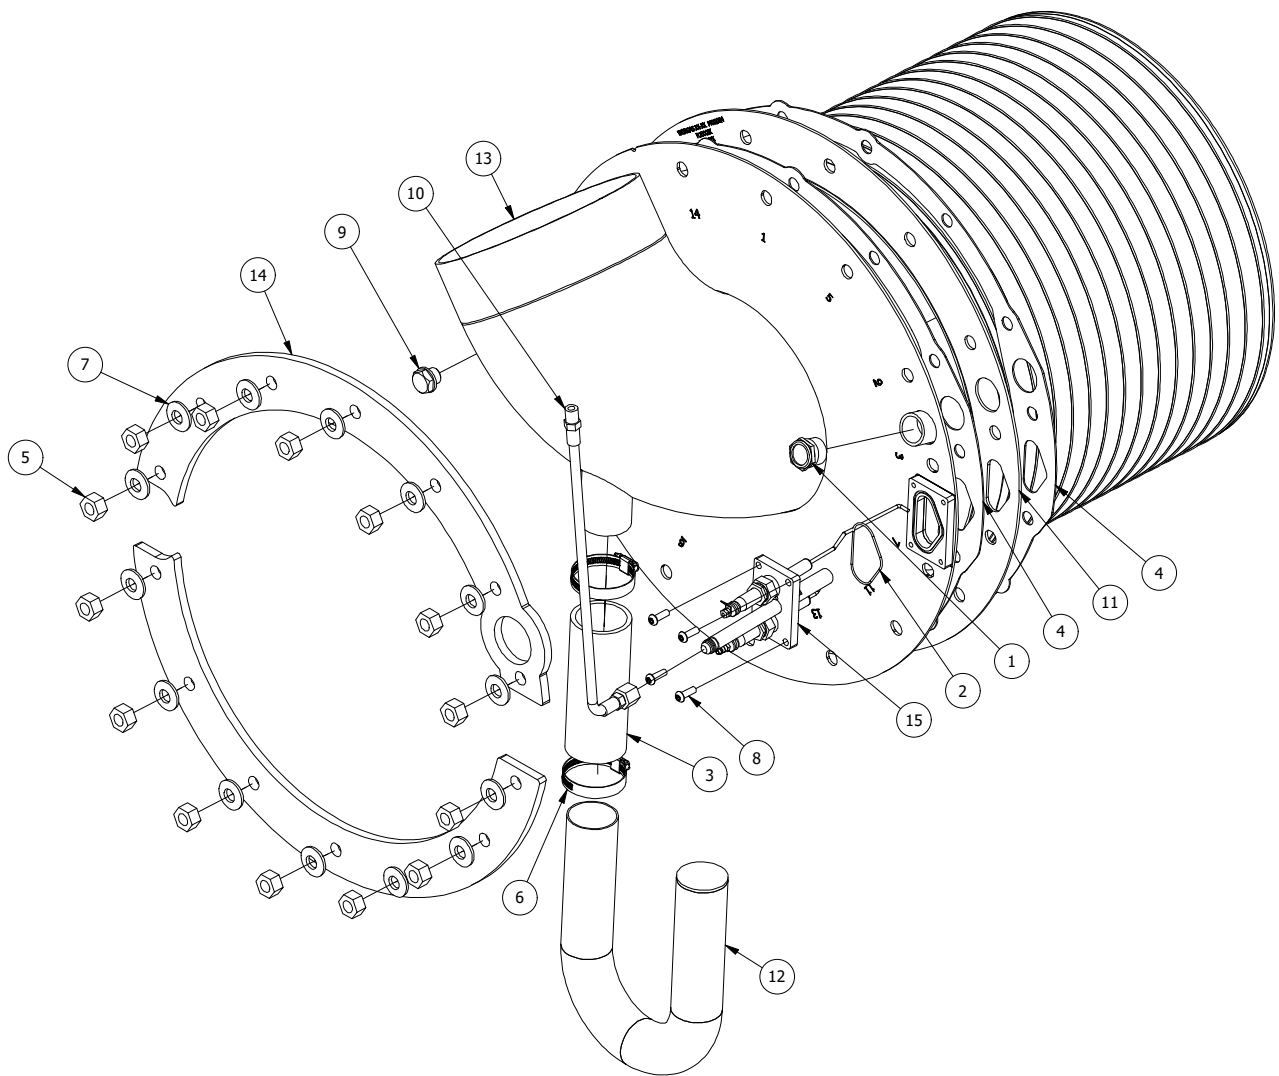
BURNER AND PRE-MIX ASSEMBLY (EXE-4000-6000)
